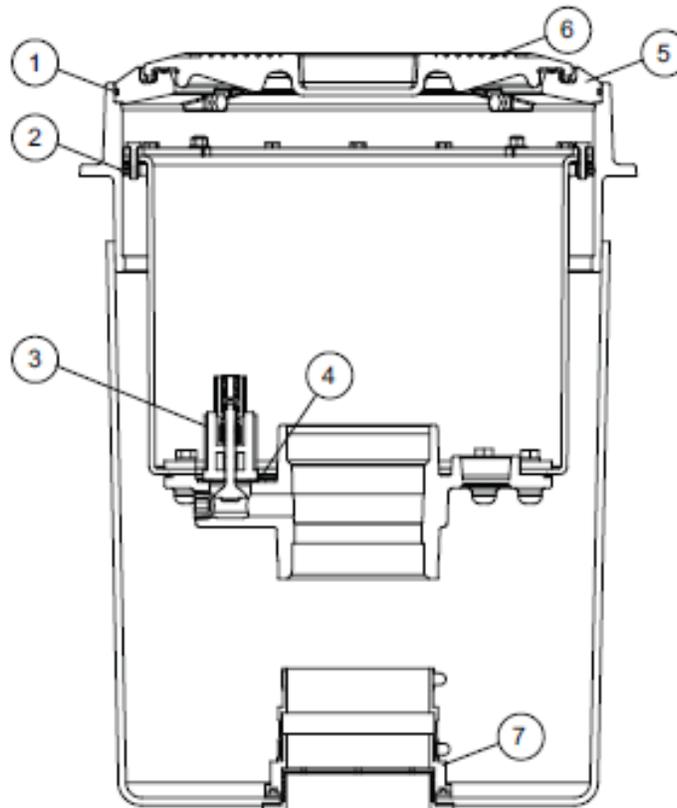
Defender Series™ (Fiberglass) Spill Container Spare Parts Location
